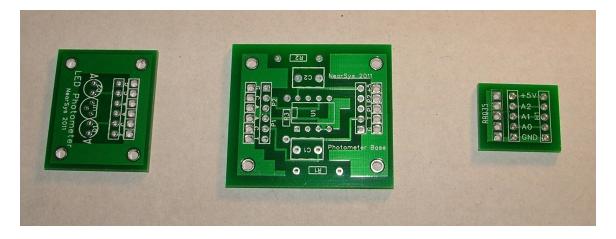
The PCBs from left to right are, The Photometer Head, Main Board, and 5-Channel Easy-Plug. They are connected together with #24 AWG wire.
